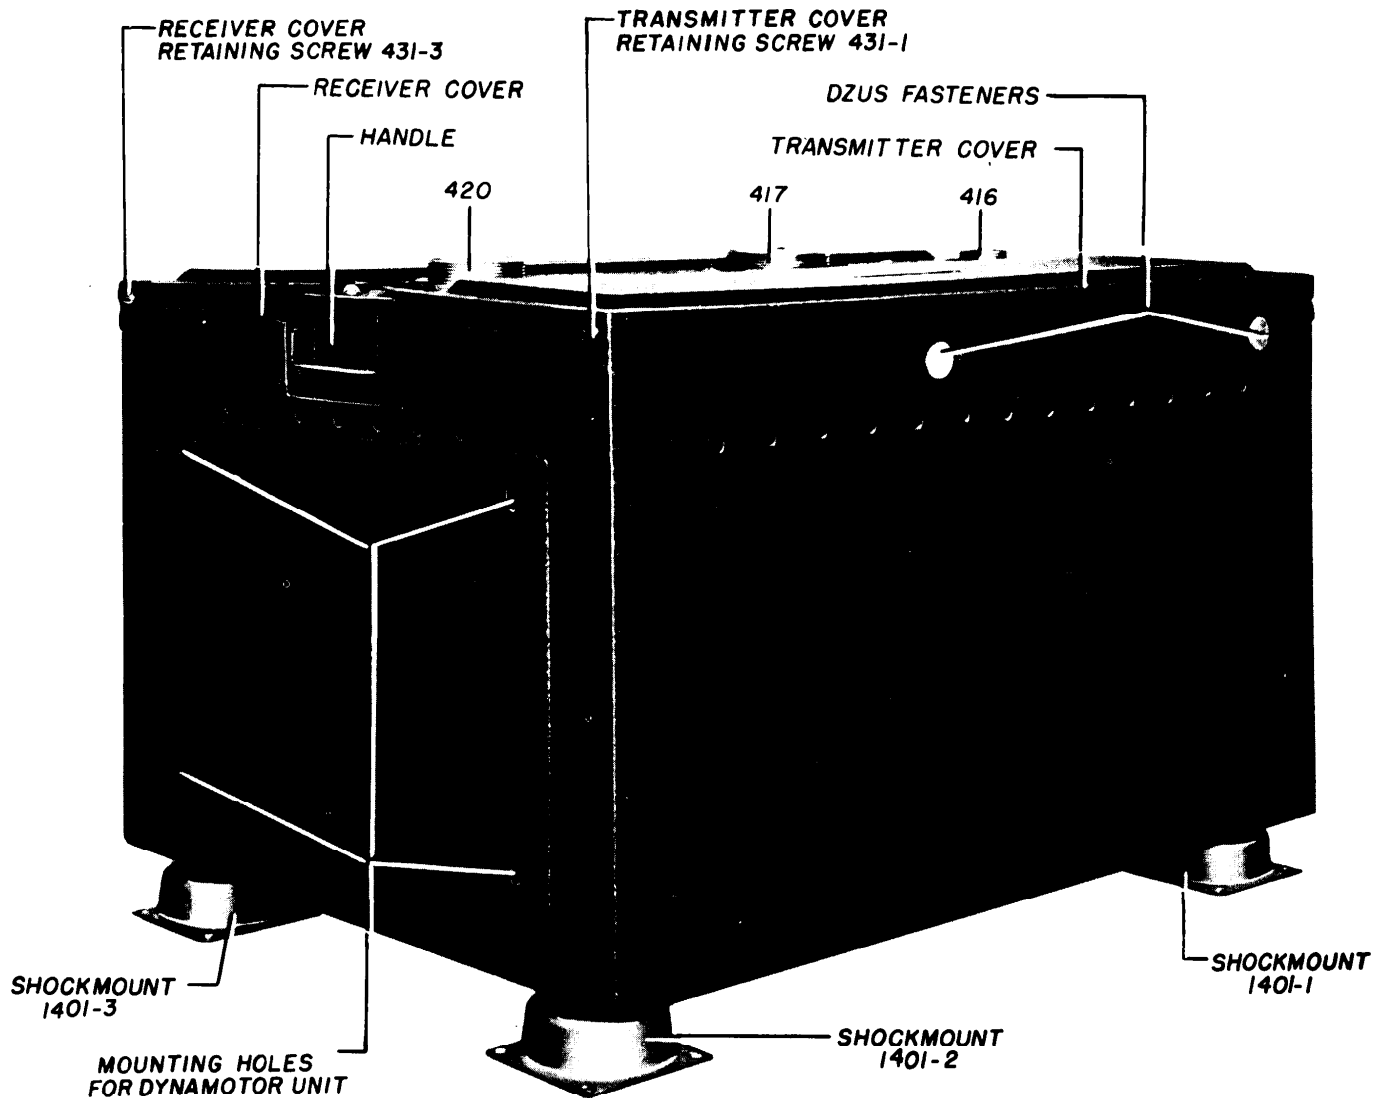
TRANSMITTER — RECEIVER ASSEMBLY, FRONT OBLIQUE VIEW
